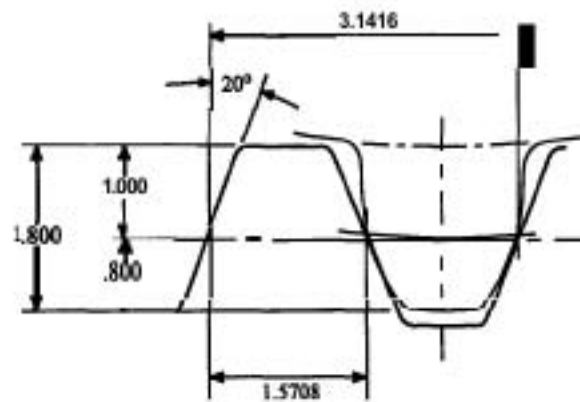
Tooth proportions for standard 1 DP 20 stub-tooth hob.
